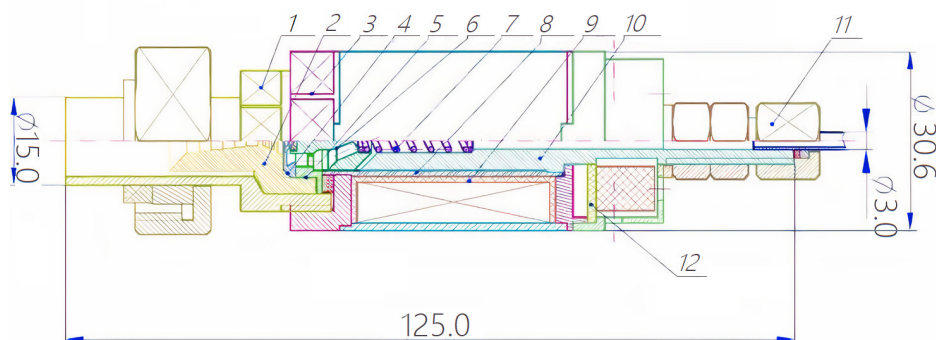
Gas valve circuit for testing seat and nozzle prototypes:
